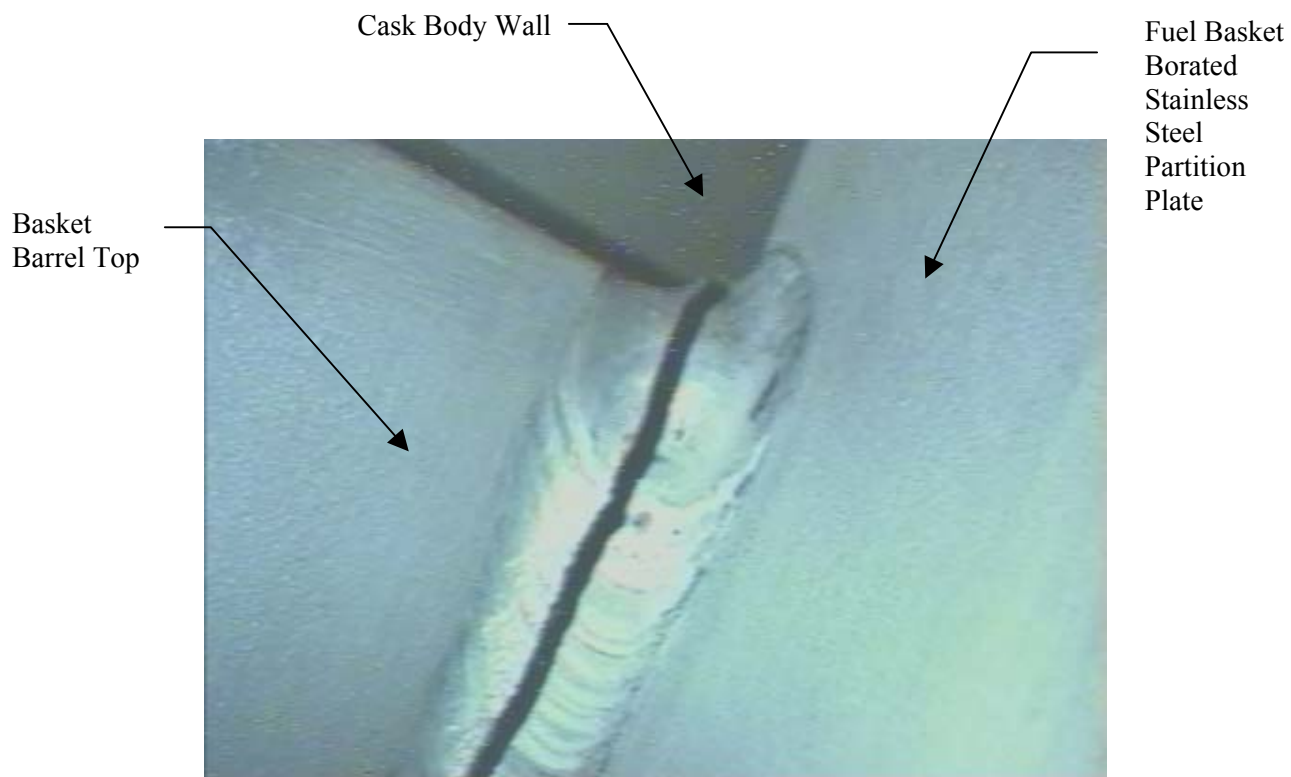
Typical top stitch weld crack at location 14 identified in Figure 2-16.
